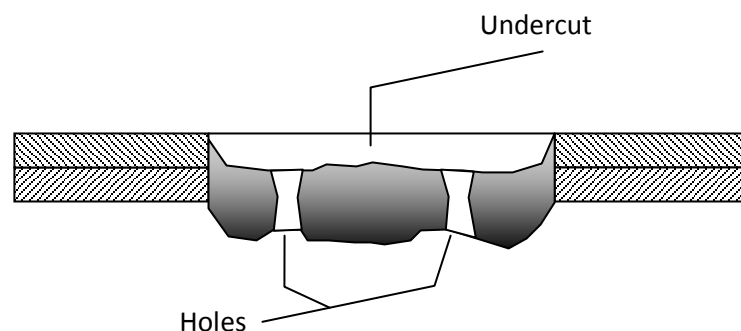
b. Schematic: Longitudinal weld section showing undercut, dropout and holes
